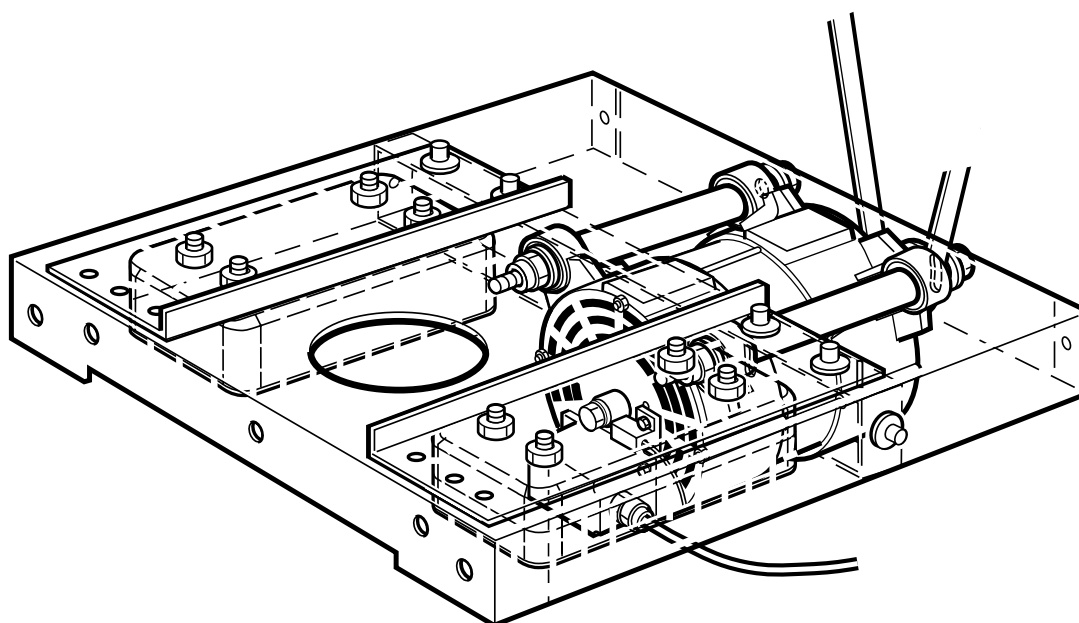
The motor is mounted inside a motor mounting unit beneath the outer drum. It drives the inner drum via a drive belt. The drive belt tension is adjusted with the aid of two retaining screws on the side of the motor mounting unit. See the section “Belt tension” in this chapter.
